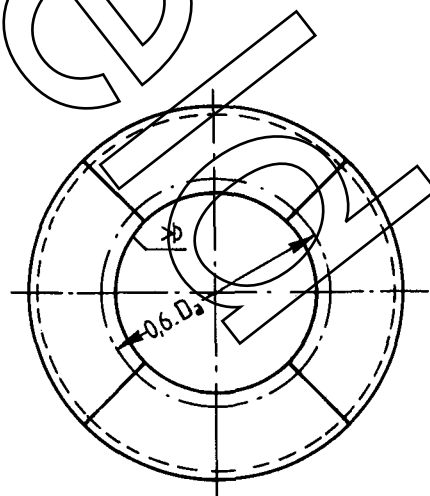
Welded dished end from crown and knuckle components outside  $0,6 D_a$   $v = 0,75$  resp.  $1,0$
